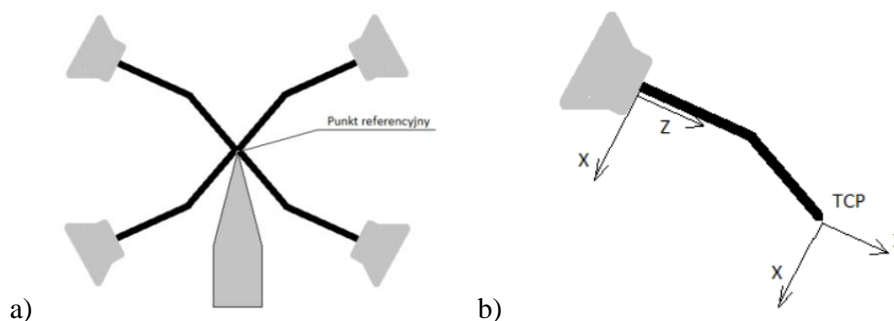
a) manual 4 points calibration method, b) TCP location in welding torch.
